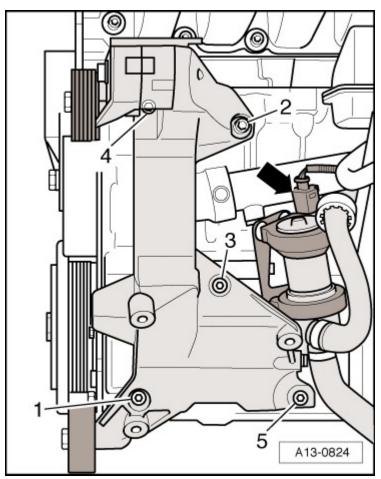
Accessory Assembly Bracket Bolts & After-Run Coolant Pump V51 Electrical Harness
